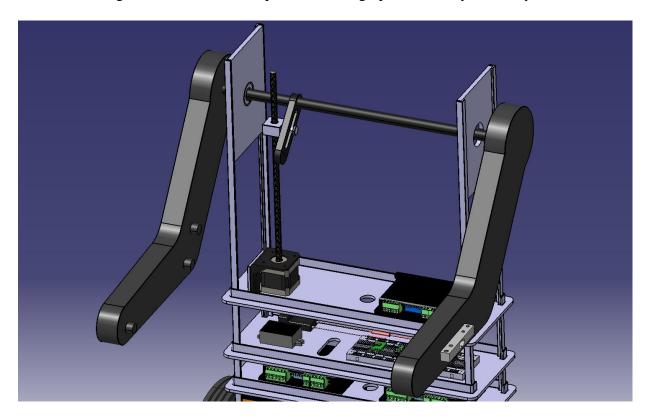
a threaded rod fed from the NEMA17 Stepper Motor Controls how much the arms /tray pivot. There are groves in the arm so that the tray can be removed and locked in place
